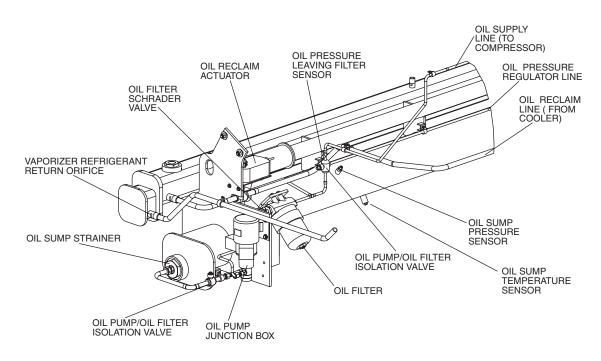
Oil Reclaim Components (Unit with R Compressor Shown)
